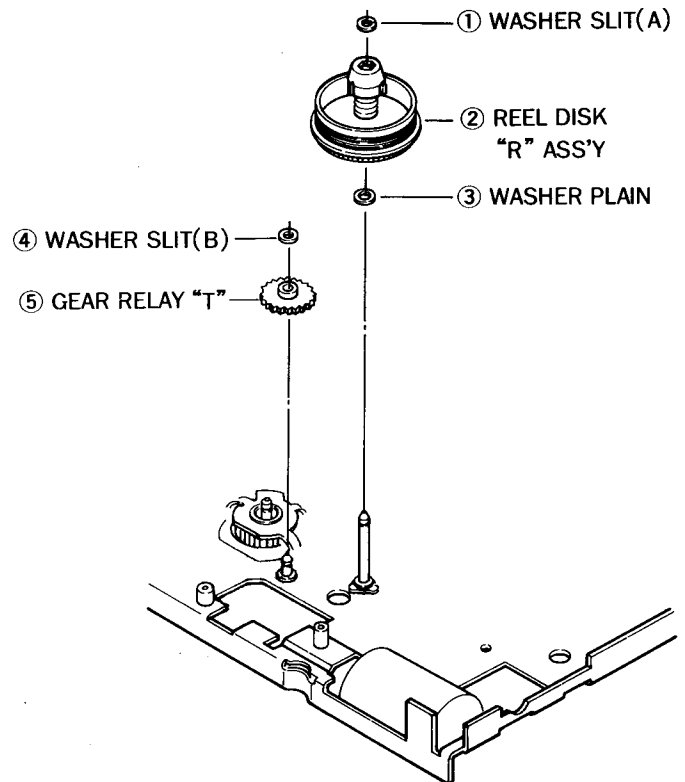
Reel Disk "R" Ass'y & Gear Relay "T" Removal
